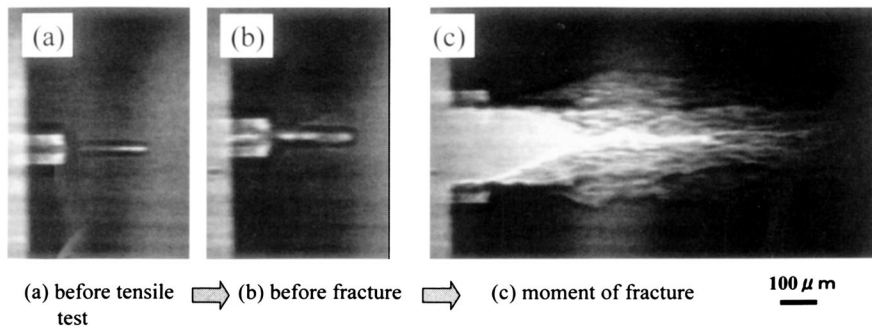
X-ray images of fracture process of A7075 aluminum alloy specimen with cylindrical micro-notch before and after tensile loading.
